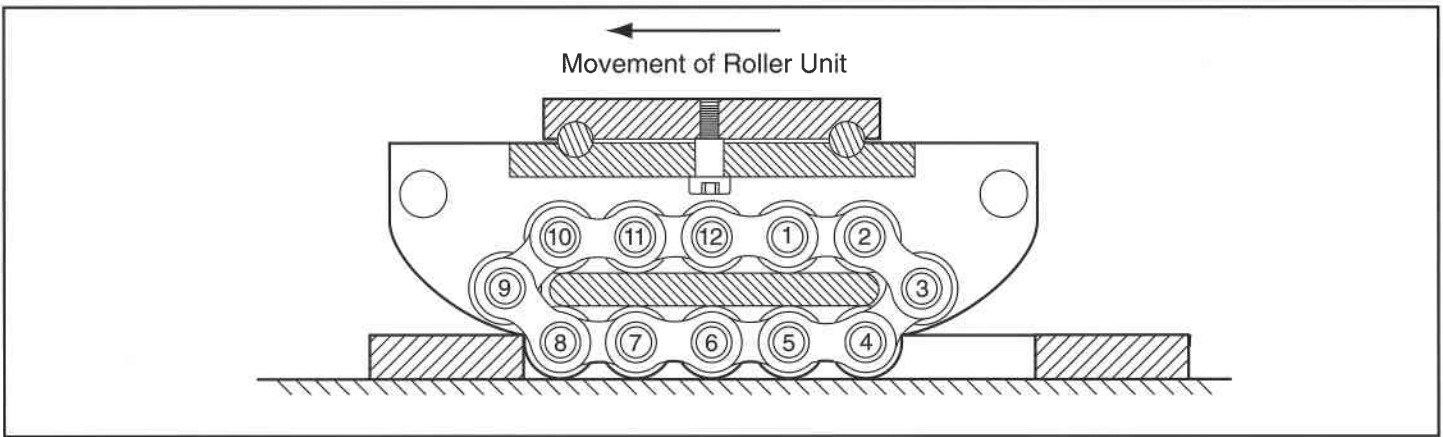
First Contact of Cylindrical Roller With Wheel Chock Face
